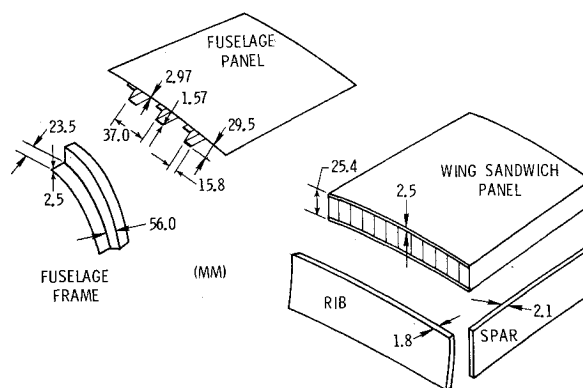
Example of detailed structural component dimensions output by the structures module (dimensions in millimeters).
